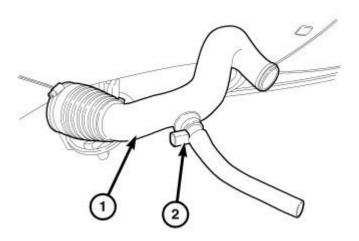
Charge Air Cooler Inlet Hose Courtesy of CHRYSLER LLC
